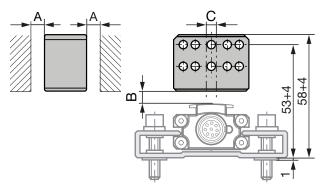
Dimensions and distances with BTL6-A-3800-2 magnet
